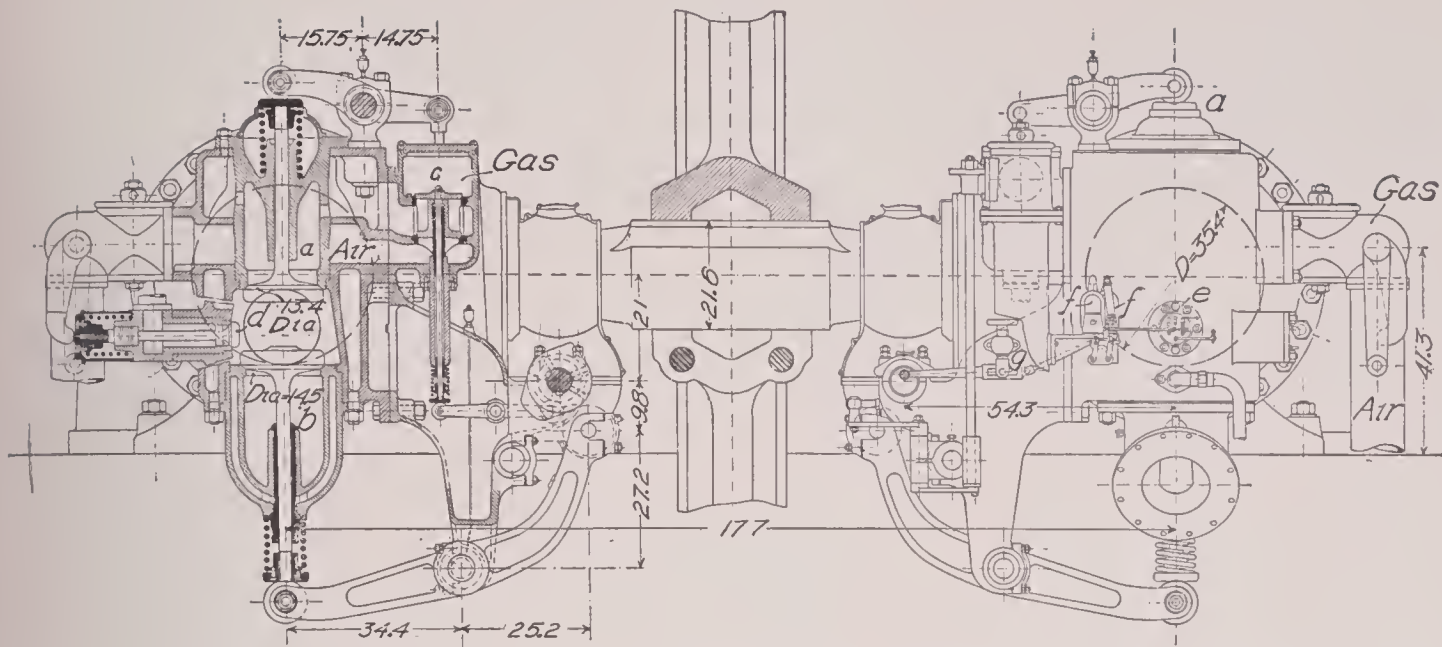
Valve Gear of a 600 H.P. Twin Engine, L. Socst & Co., Düsseldorf-Reisholz.
